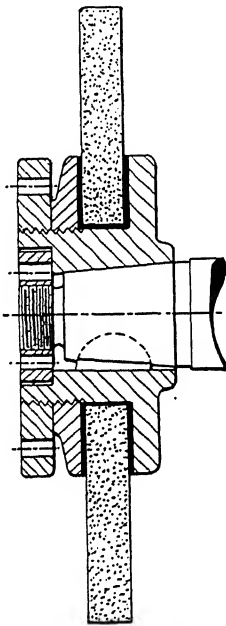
Edge Grinding Wheel with Bevelled Safety Flanges
